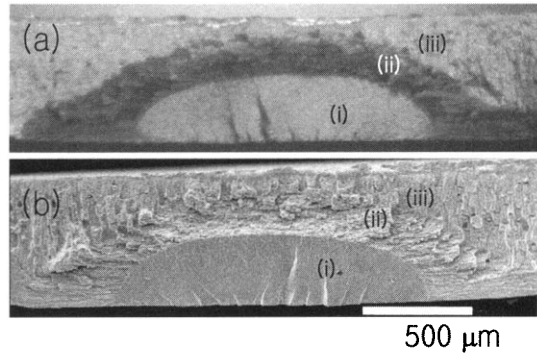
Cross-section of fracture surface showing (i) fatigued pre-crack, (ii) I-SCC crack and (iii) ductile fracture; (a) optical image and (b) SEM image.
